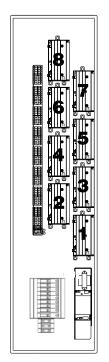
HWI-MI-120 Mounted in a HWBP-8D Enclosure
